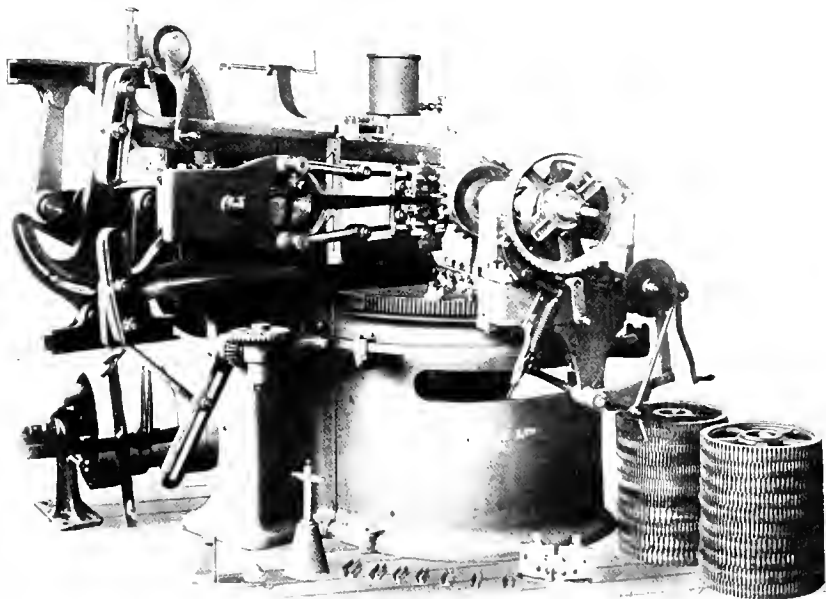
The Smith & Coventry Odontographic Bevel Gear Planing Machine.
